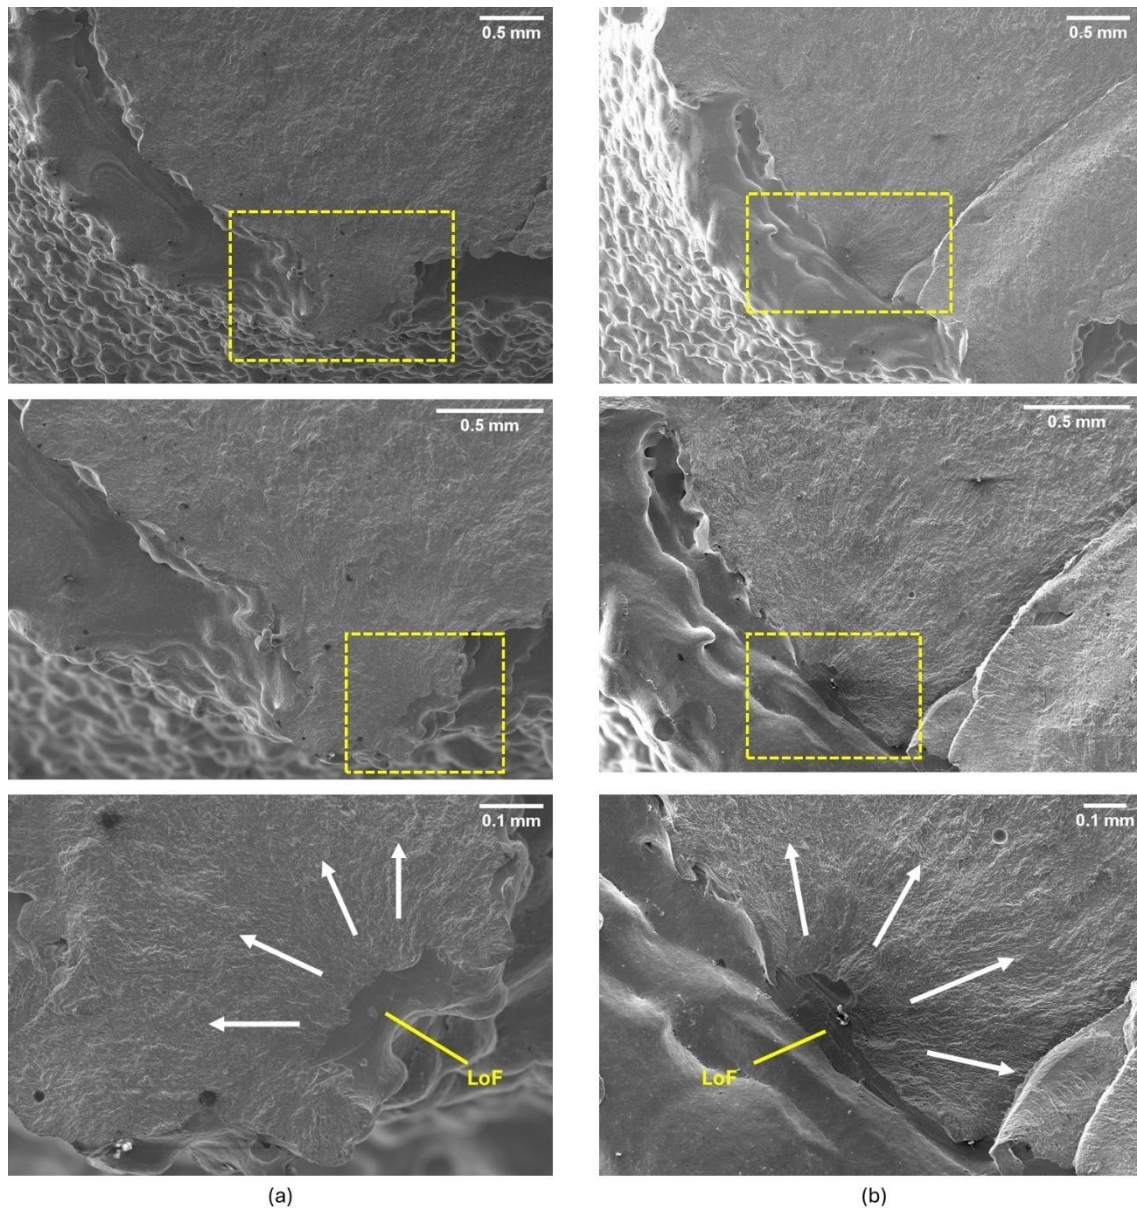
SEM image of the fracture surfaces of (a)SR-L-1 and (b)SR-L-4 stem specimens taken at the locations of LoF defects as shown in Fig. 6.17
